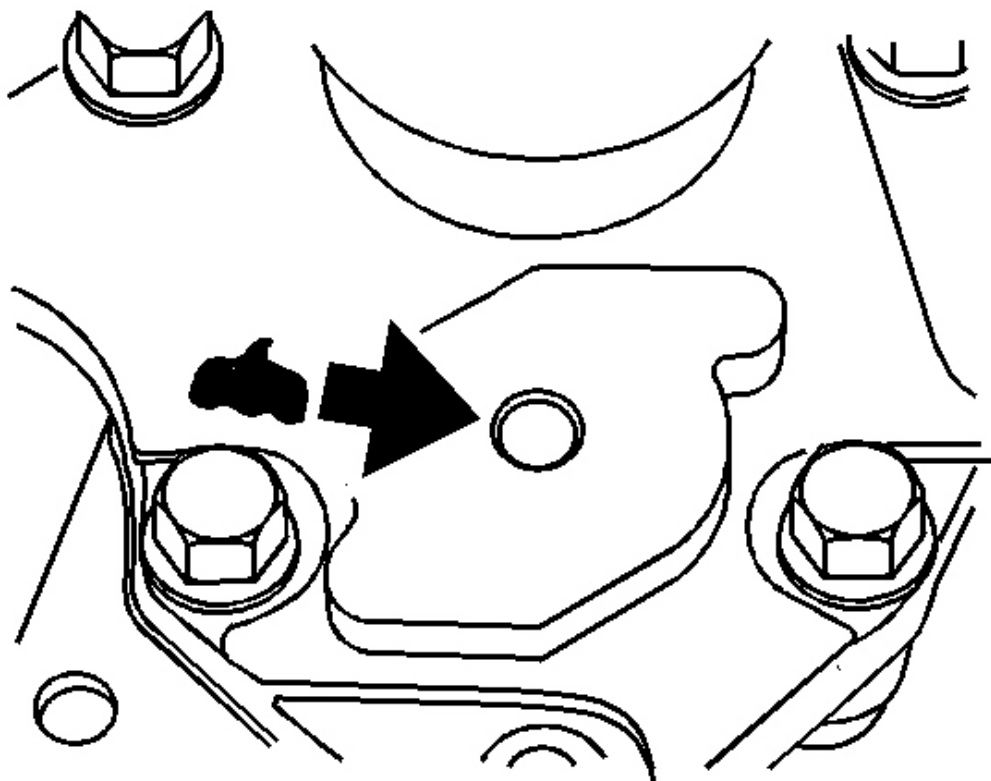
Packing Cavity Of Inner Intermediate Shaft Bearing Housing With Grease
